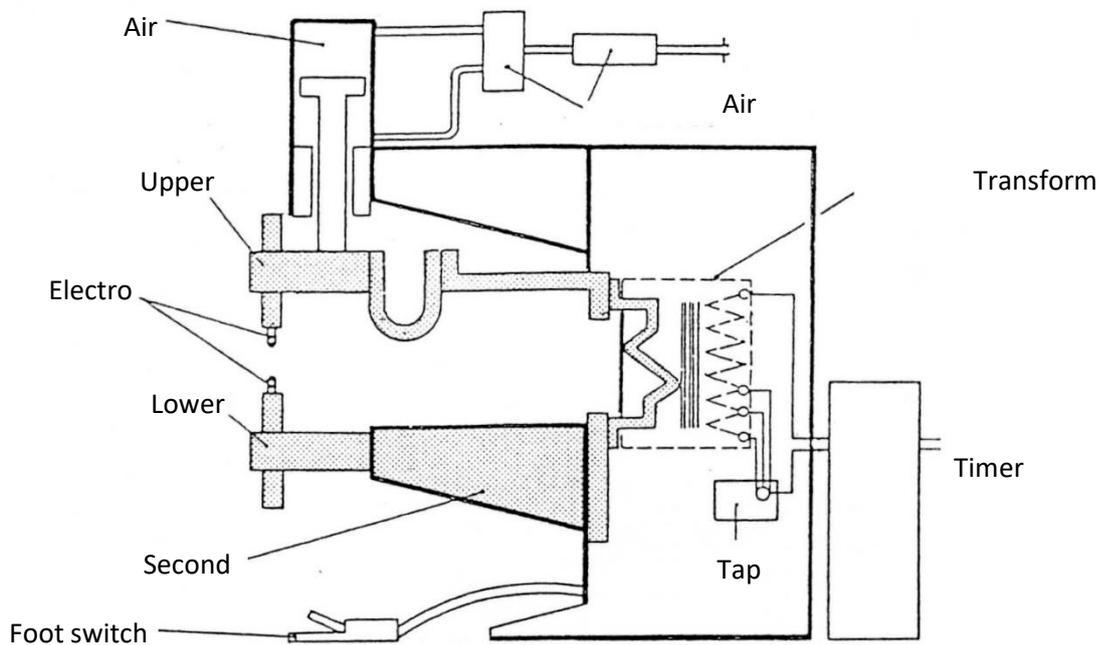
Pedestal spot welding machine. Source: TWI
